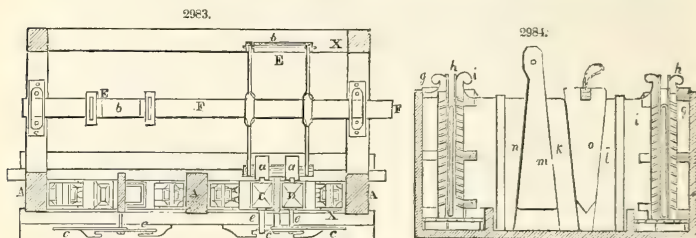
A, upright guides; C and D, spring and driving stampers; E, lifting-roller; F, lifting-shaft; *a a*, cams of stampers.
